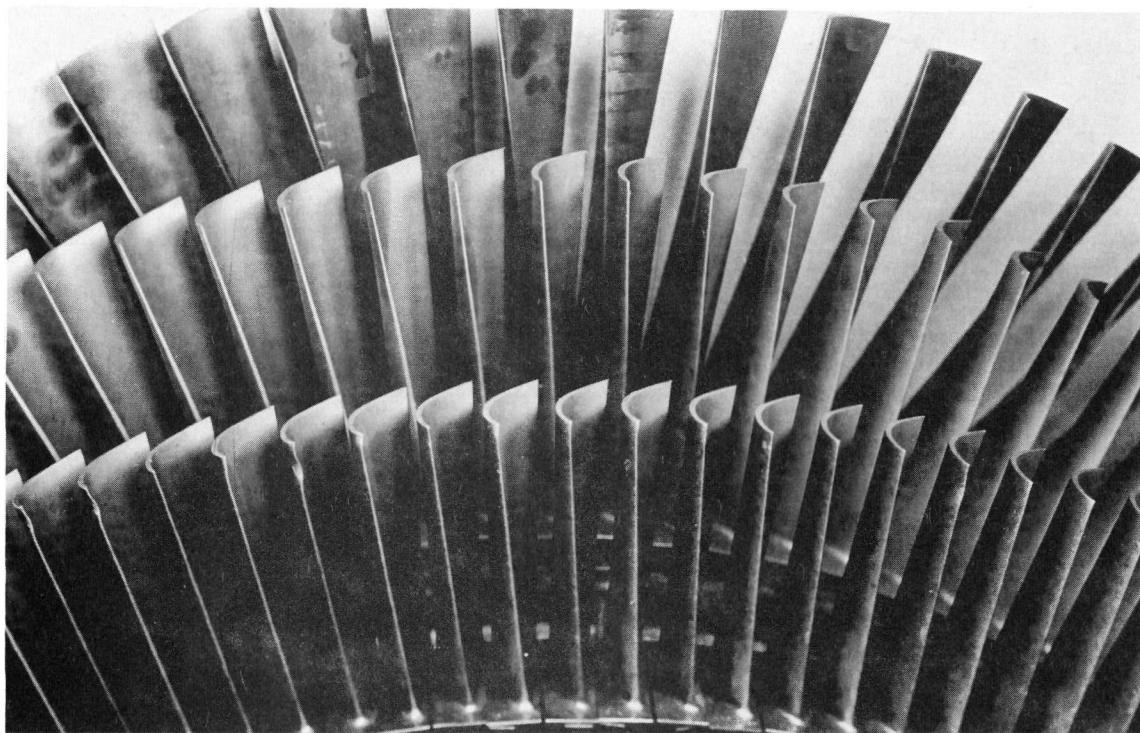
Turbine rotor assembly (Neg. 256591)
